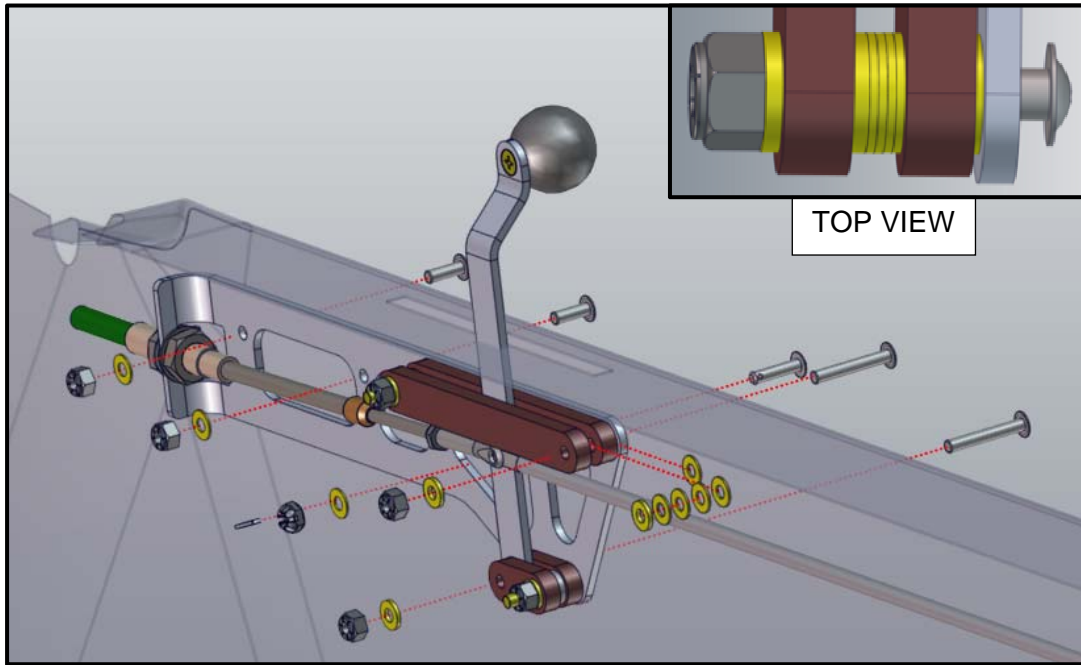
Throttle Linkage Rod and Hardware Removal
